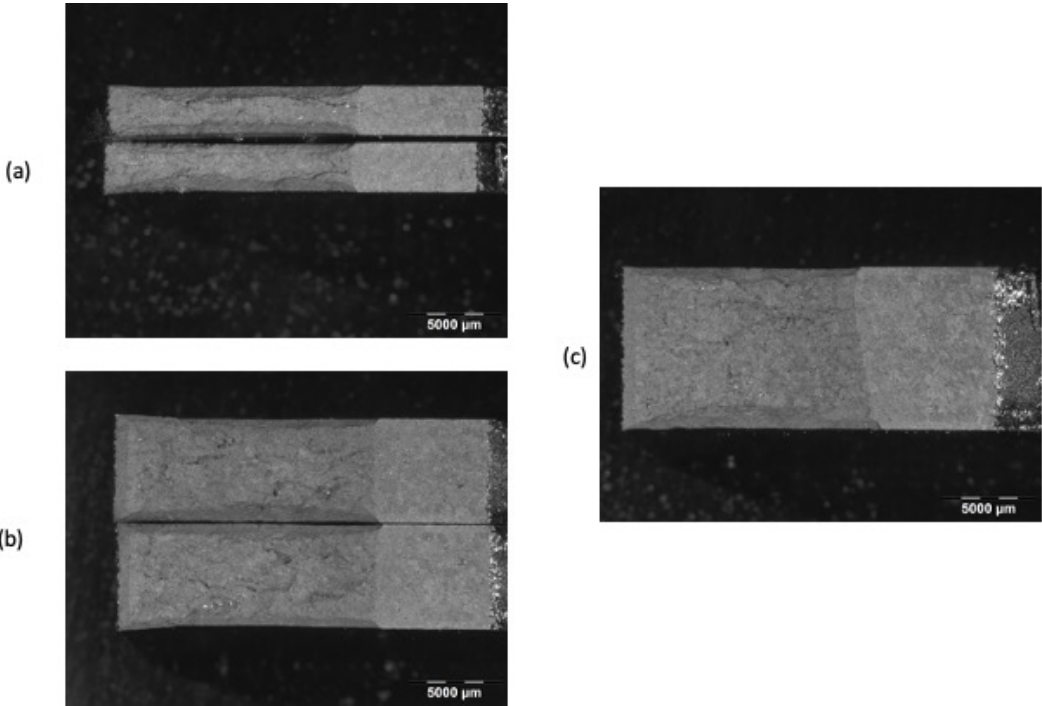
Fracture surfaces for representative CT specimens of each thickness. Shown are specimens with 3(a), 6(b) and 9(c)mm thickness.
